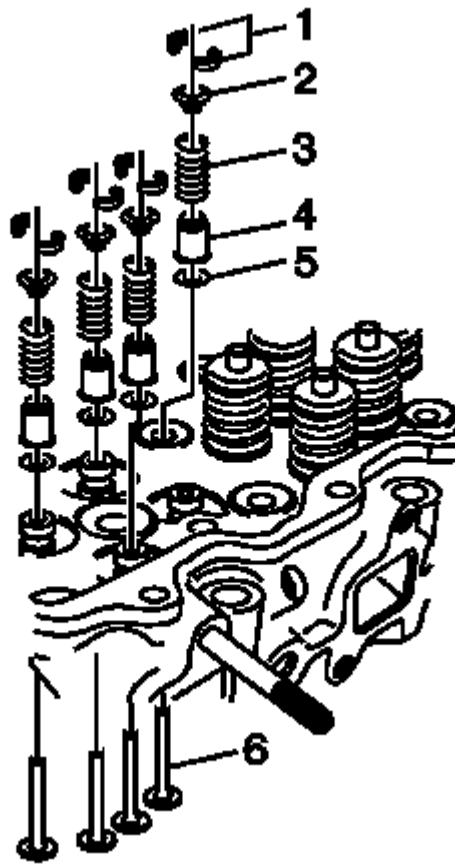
View Of Valve Stem Oil Seal & Valve Spring
